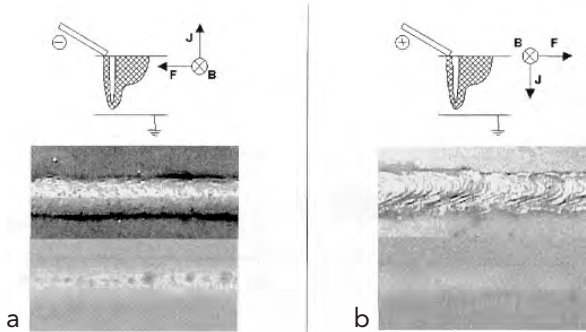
Effect of electromagnetic body forces (F) on seam surface and process pore formation during welding. AA6xxx; Nd: YAG laser, 4 kW; $v = 3.6\text{m/min}$, current supply via filler wire Al Si 12; $I = 30\text{A}$, $B = 400\text{mT}$; shield gas: He [2]
